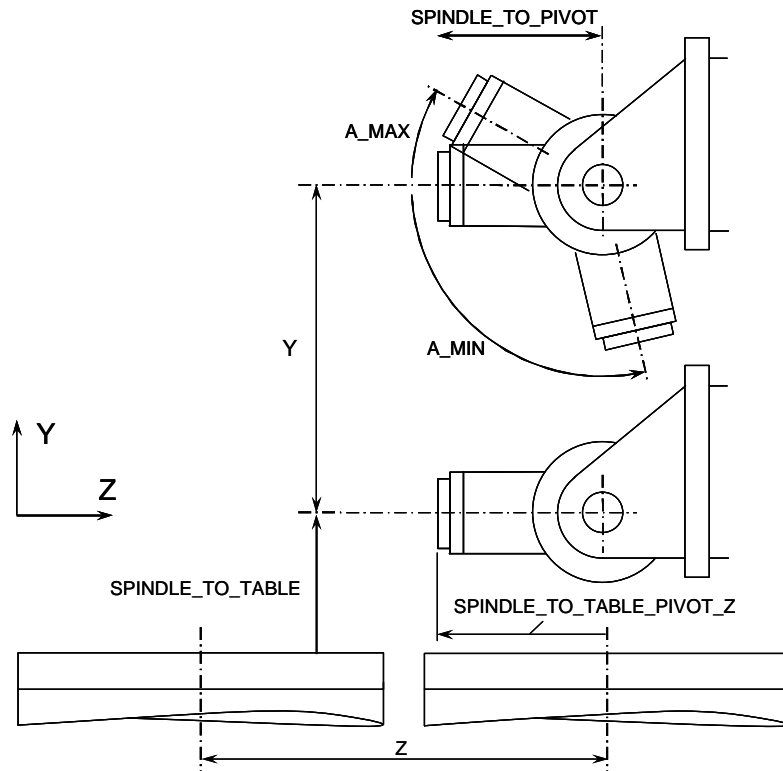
Work zone parameters for a horizontal machining center with A-axis tilt spindle and B-axis rotary table.
